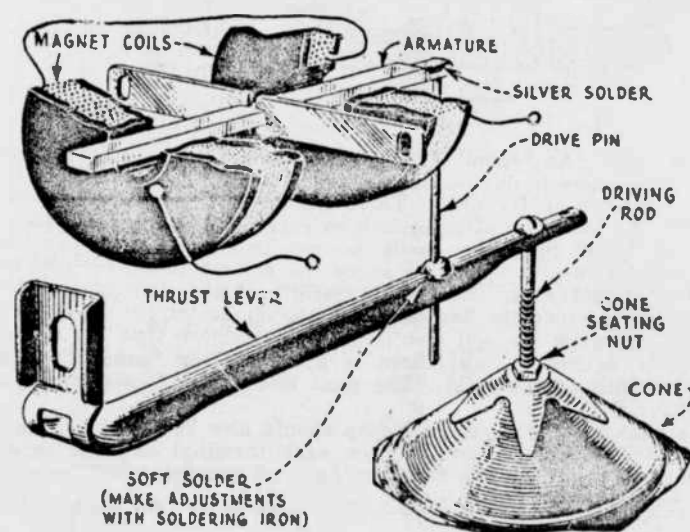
Cut-away view showing the essential components in the motor of a typical balanced-armature type loud speaker unit. The permanent magnet and pole pieces have been omitted for clarity.
